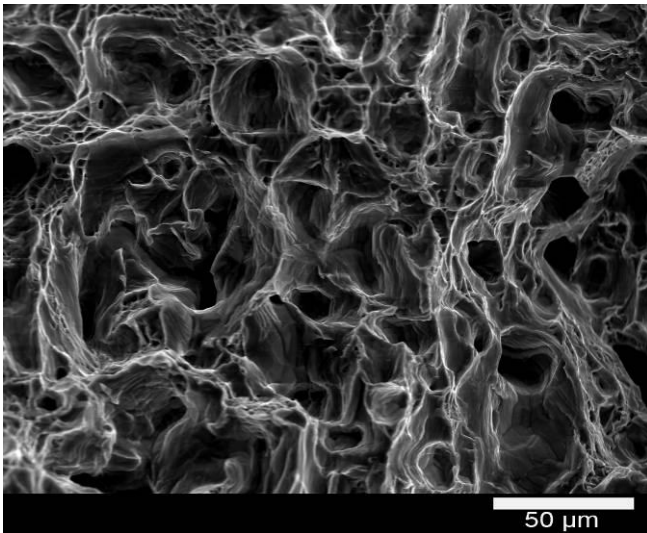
Tensile fracture surface of MIM31L samples. Pores and dimples are visible.
